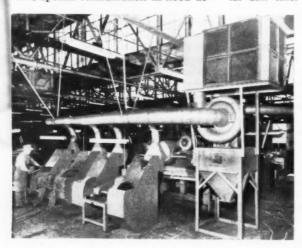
Exhaust hoods designed for polishing wheels which rotate in either direction.
